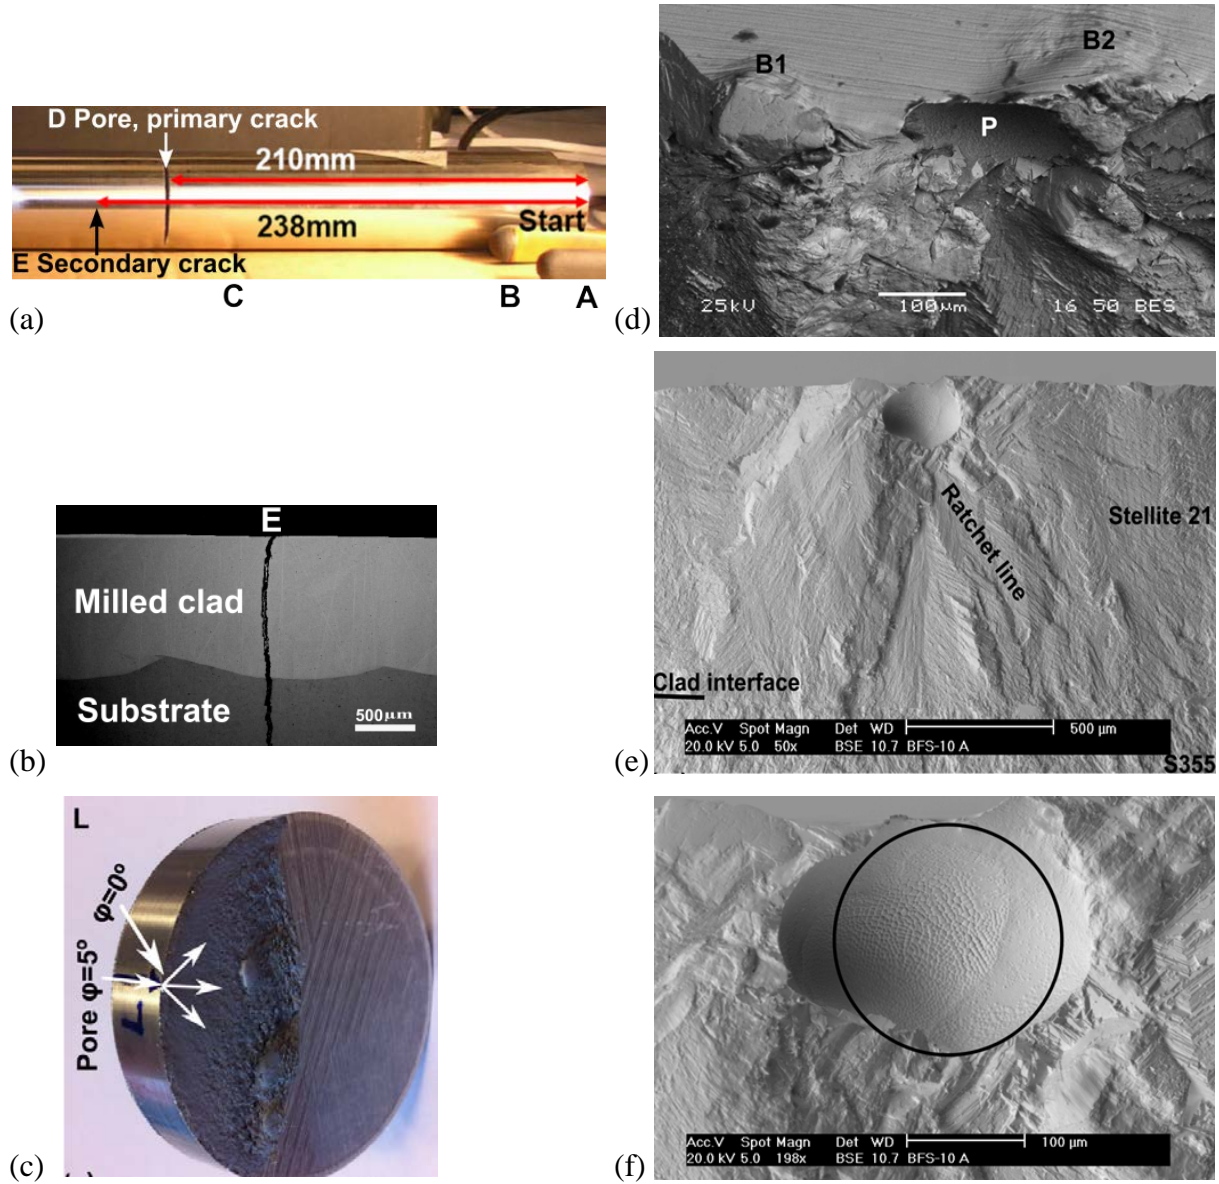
(a) 2 cracks at round rod (here non-clad, for comparison) after four-point bending fatigue testing, (b) secondary crack through the clad layer, (c) fracture surface of the rod with pore location as crack initiation, (d)-(f) surface pore and crack surface with ratchet lines.
